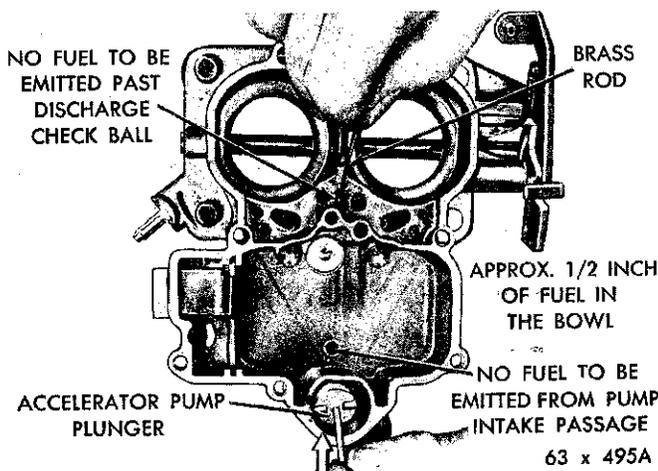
Testing Accelerator Pump Discharge and Inlet Check Balls
